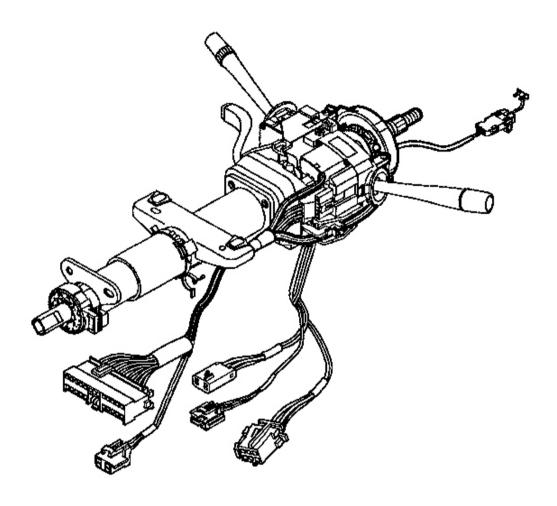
Wire Harness Assembly & Steering Column Jacket Assembly Courtesy of GENERAL MOTORS CORP.
